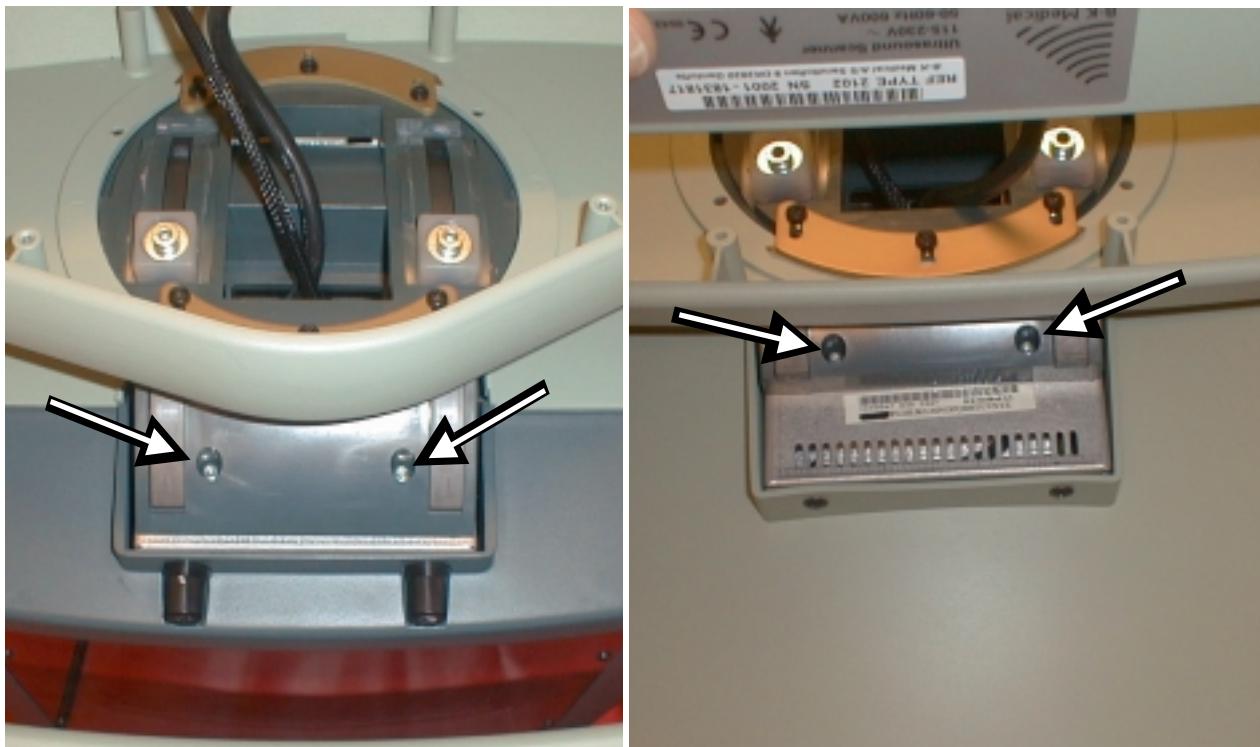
1-37. Cable covers on monitor base assembly
